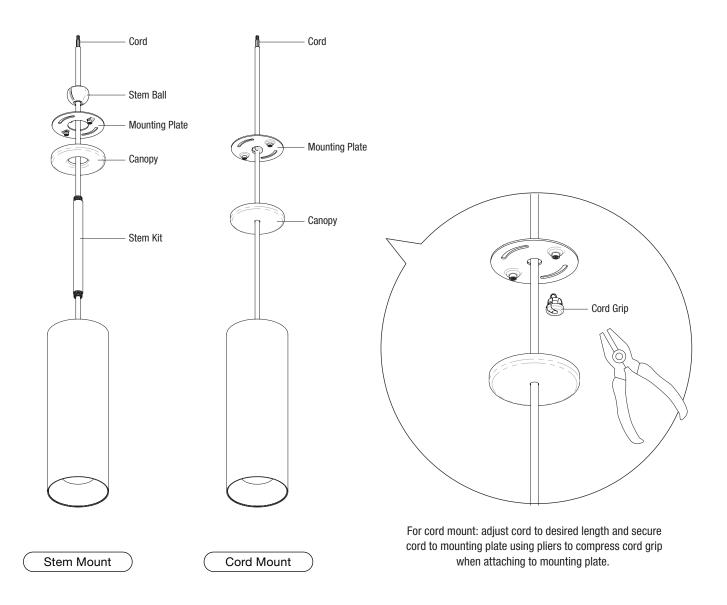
CYLINDER, STEM/CORD, V-1, UPDATED 02/17/22
